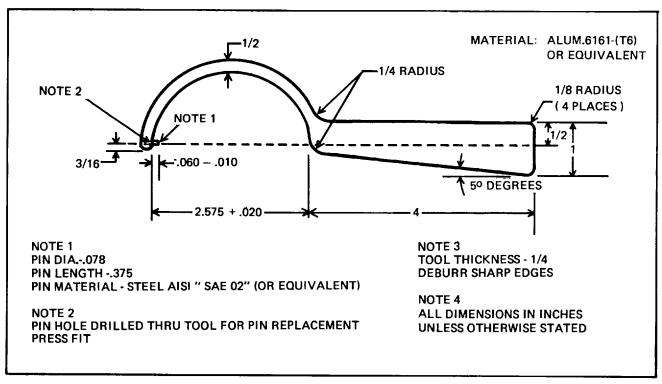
Spanner Wrench (Retaining Ring Eyepiece Assembly)
